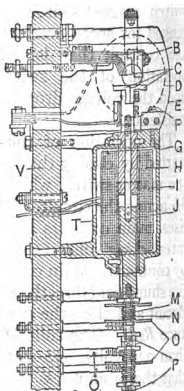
Section through Contactor. B—Graphite Arcing Contact; C—Copper Contacts; D—Blow-out Coil; E—Arc Shield; F—Arc Shield Fastener; G—Magnet Cap; H—Magnet Coil; I—Stationary Core; J—Plunger; M—Insulating Tube; N—Interlock Spring; O—Interlock Disks; P—Insulating Bushings; Q—Interlock Fingers; T—Magnet Frame; V—Panel
